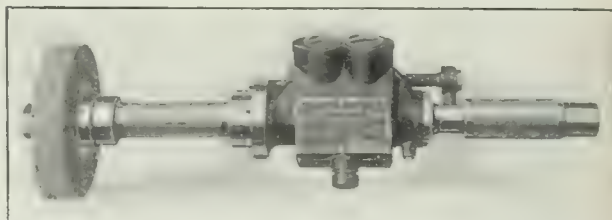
The Style A Portable Emery Grinder Made by the Cleveland Pneumatic Tool Company, Cleveland, Ohio.
